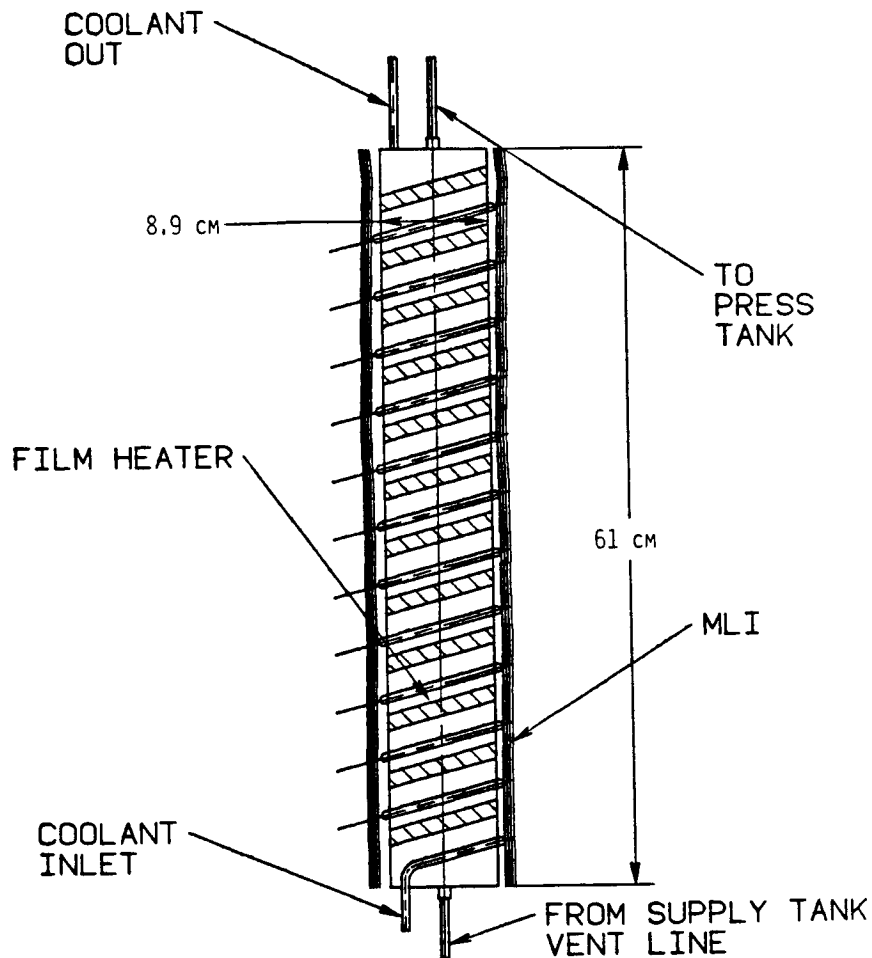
HYDRIDE COMPRESSOR DETAIL.
